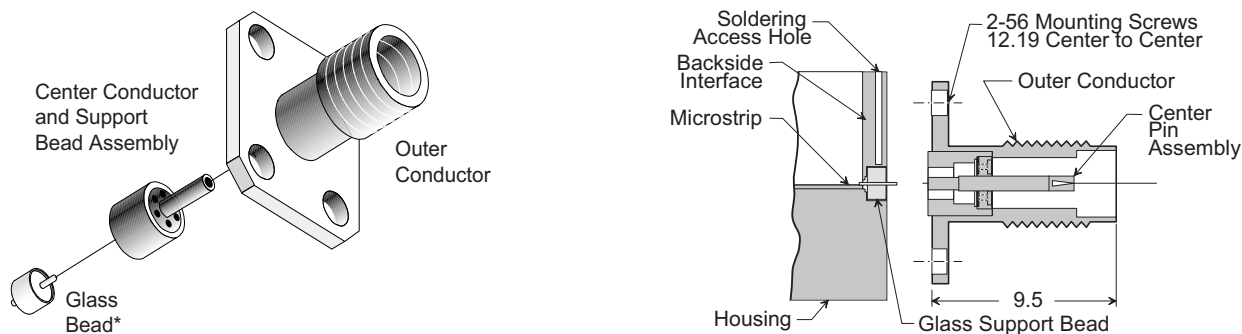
K104F-R or EK104F-R Assembly (*Glass Bead not supplied)
